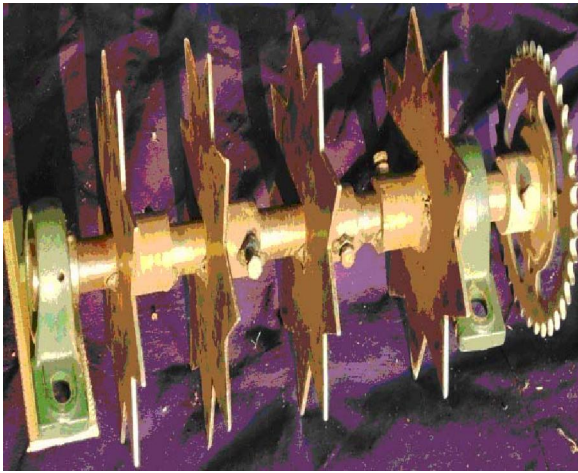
Assembly of L-blade rotor and sprocket arrangement
